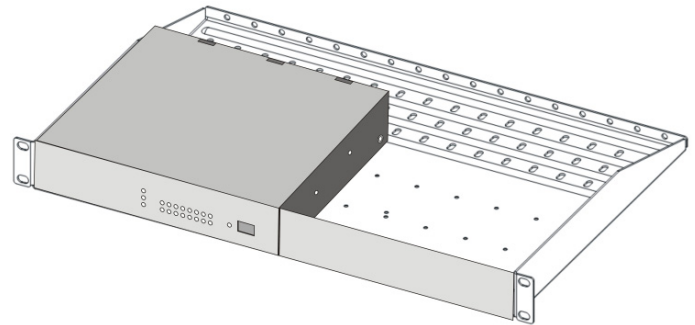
RACK SHELF WITH MOUNTED DEVICE AND FILL PLATE
